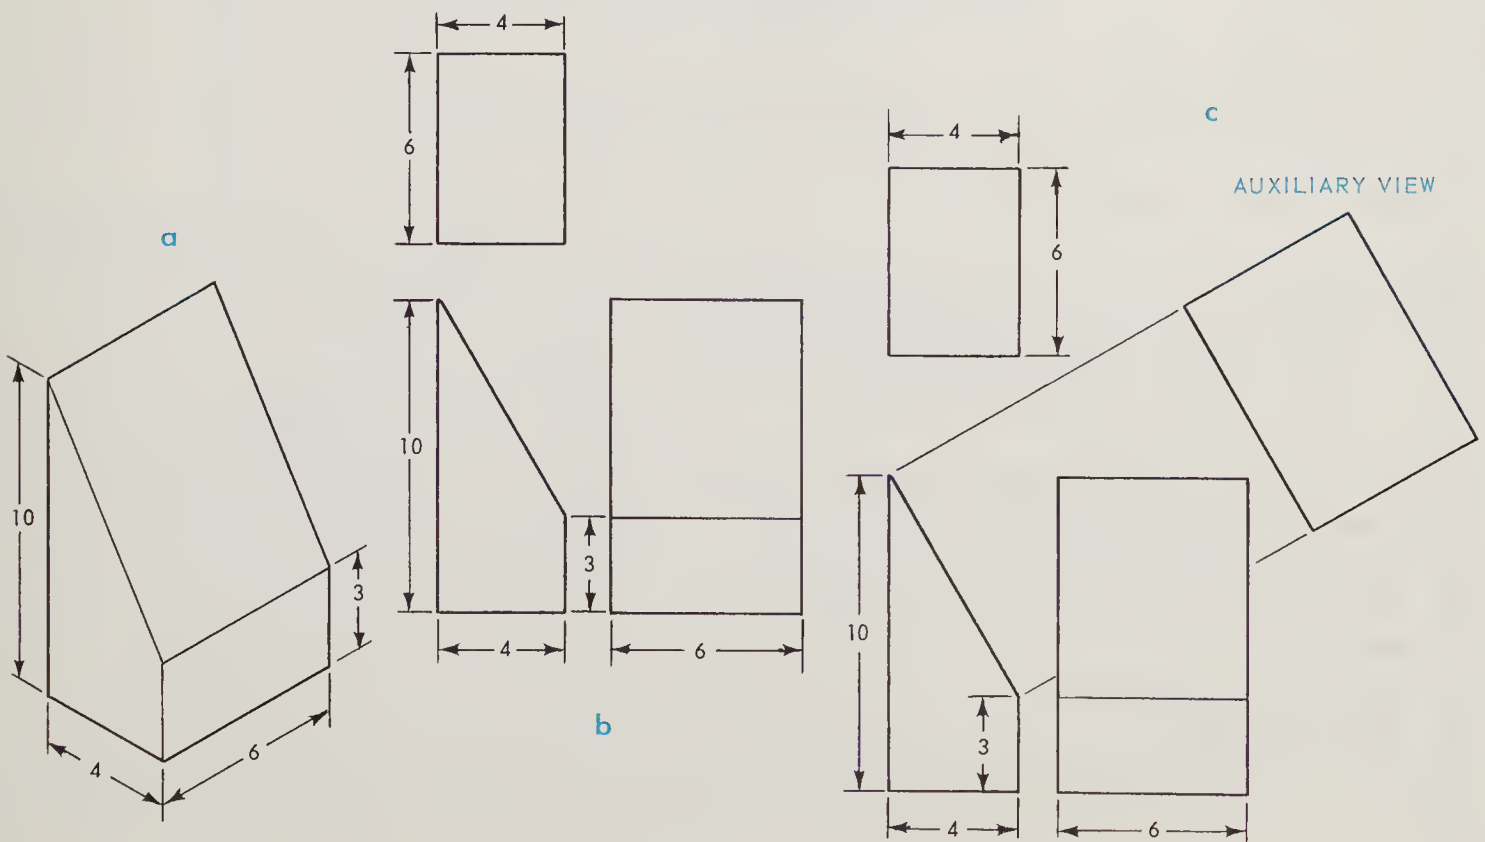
Auxiliary view is added to give size and shape of inclined surface.
